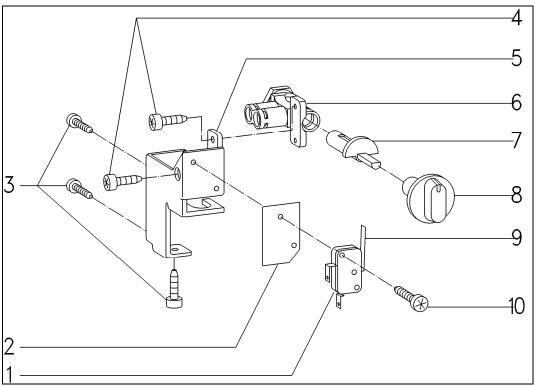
Components of Steam Valve and Steam Valve Switch
